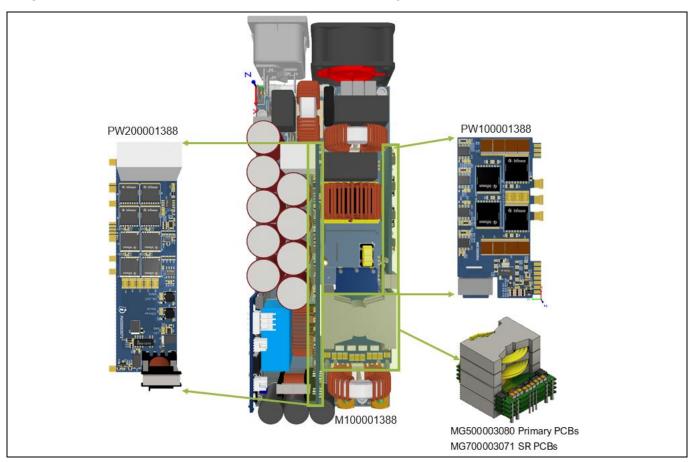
REF_3K3W_3LFC_PSU main board and daughter cards with their assembly
